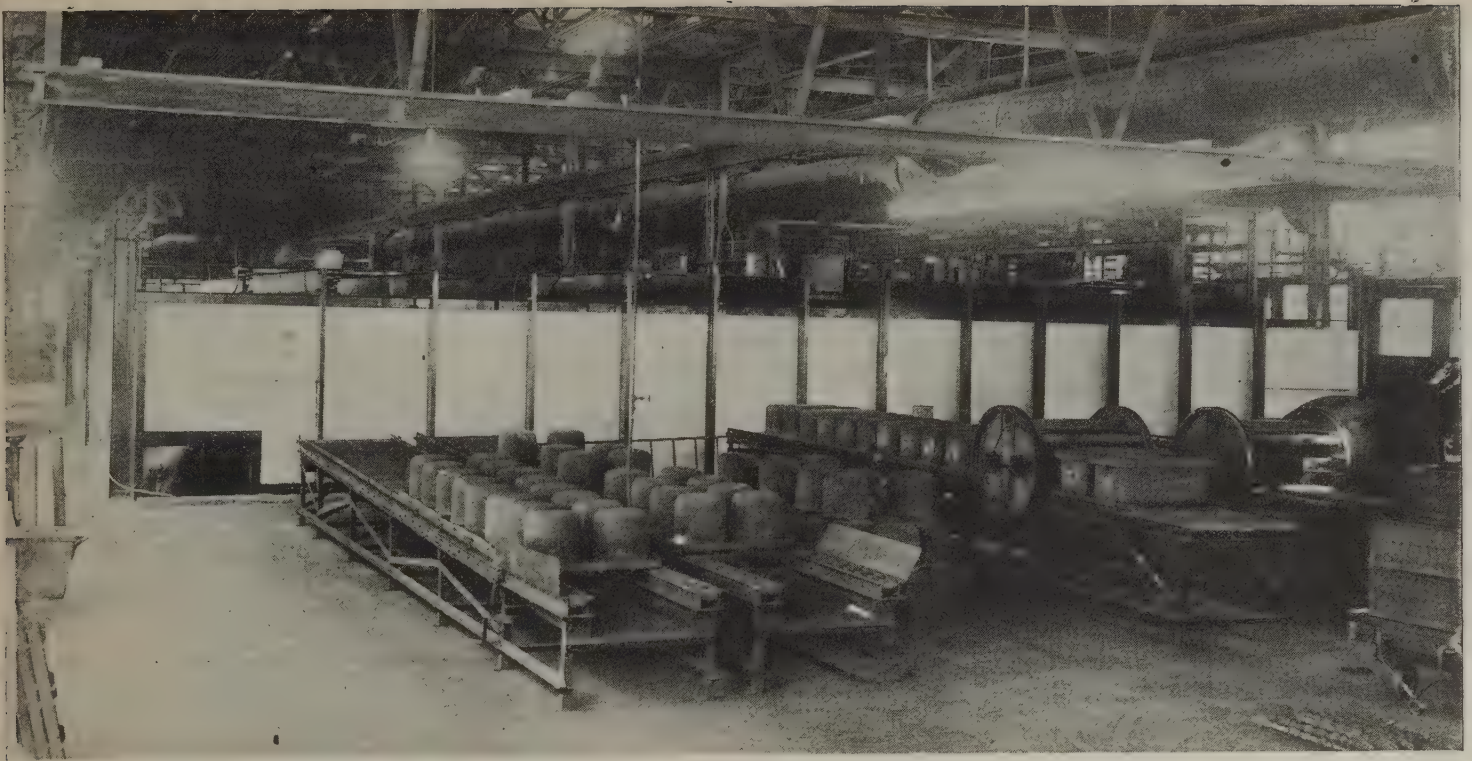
Loading and Unloading Equipment for Pot Carburizing. Straight-line counterflow furnaces in the rear
